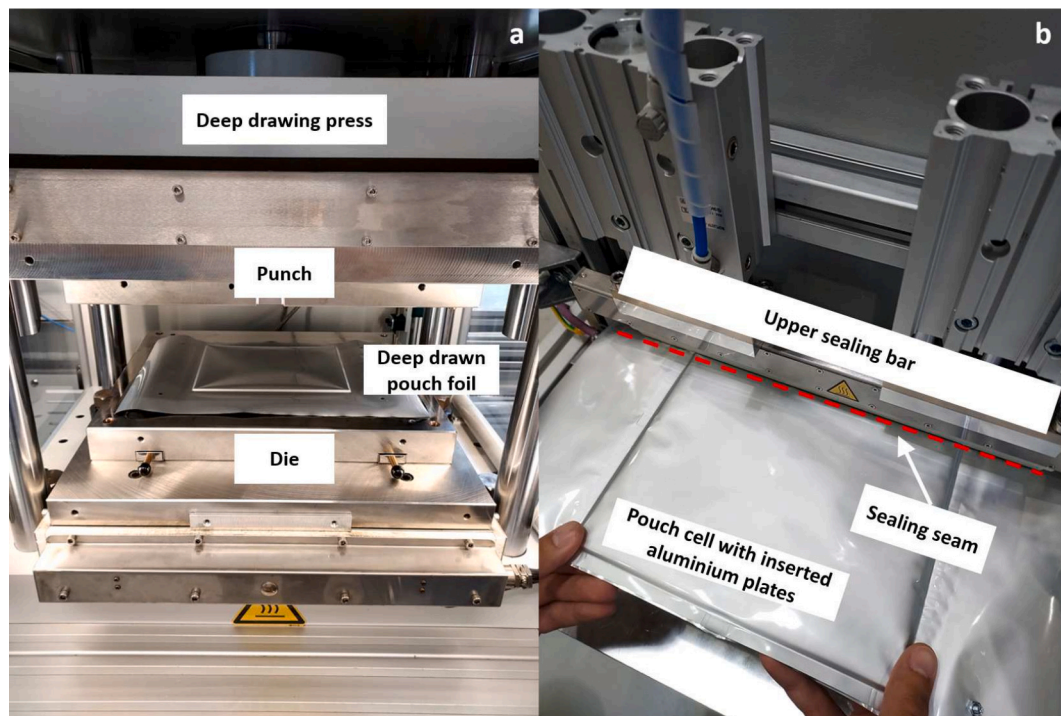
Preparation of the pouch cells: deep drawing (a) and sealing (b).
